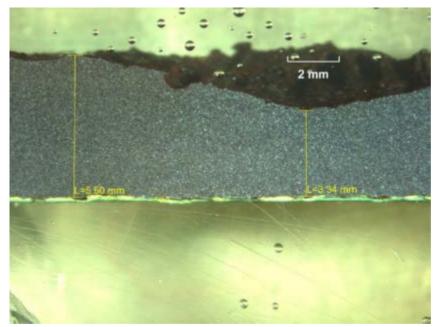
Cross Section of Coupon 3 at Area of Maximum Wall Loss
